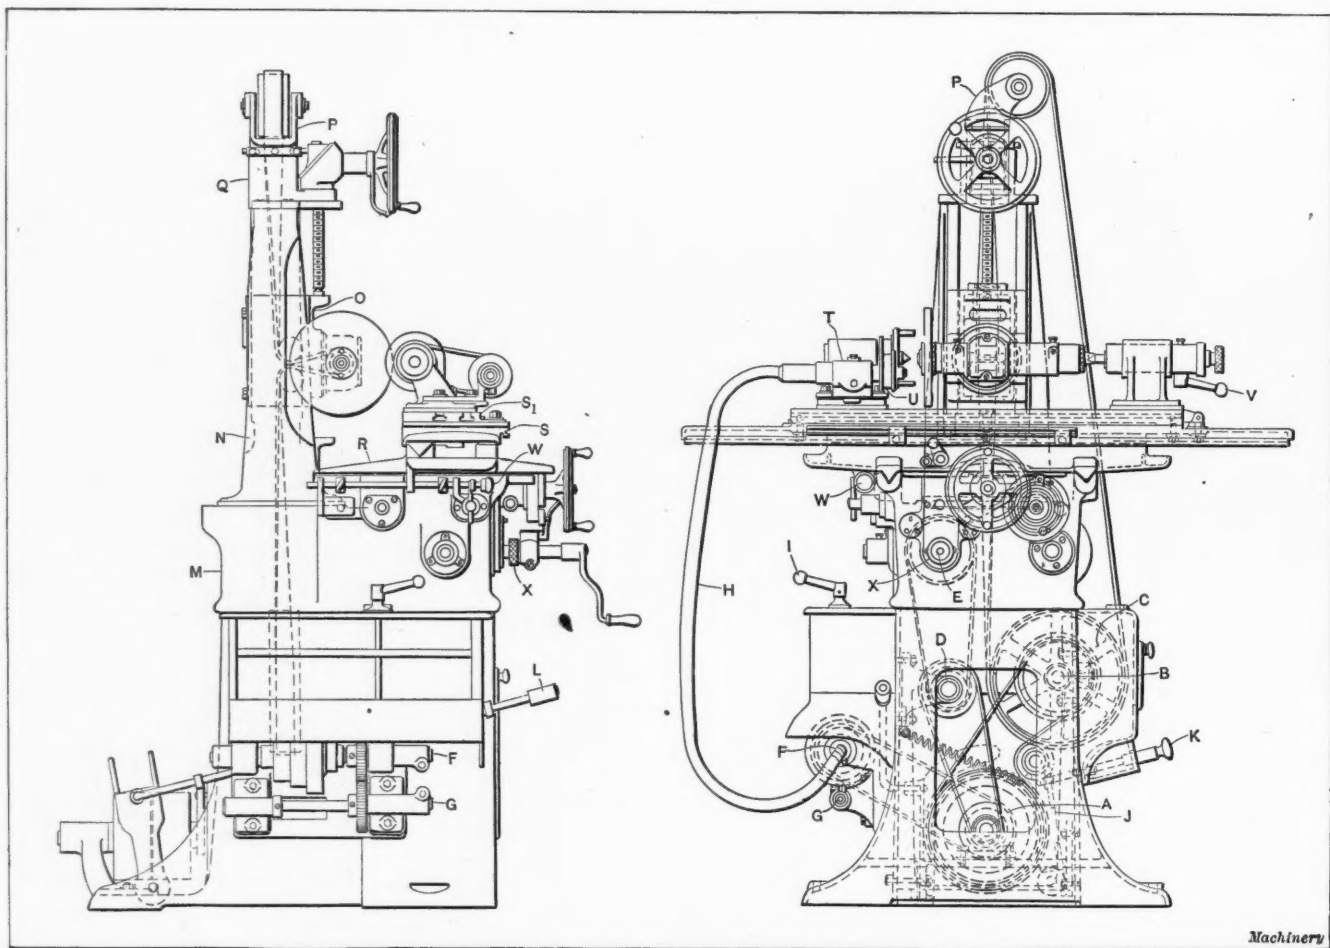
Showing Course of Spindle Driving Belt for Various Positions of Grinder Head
